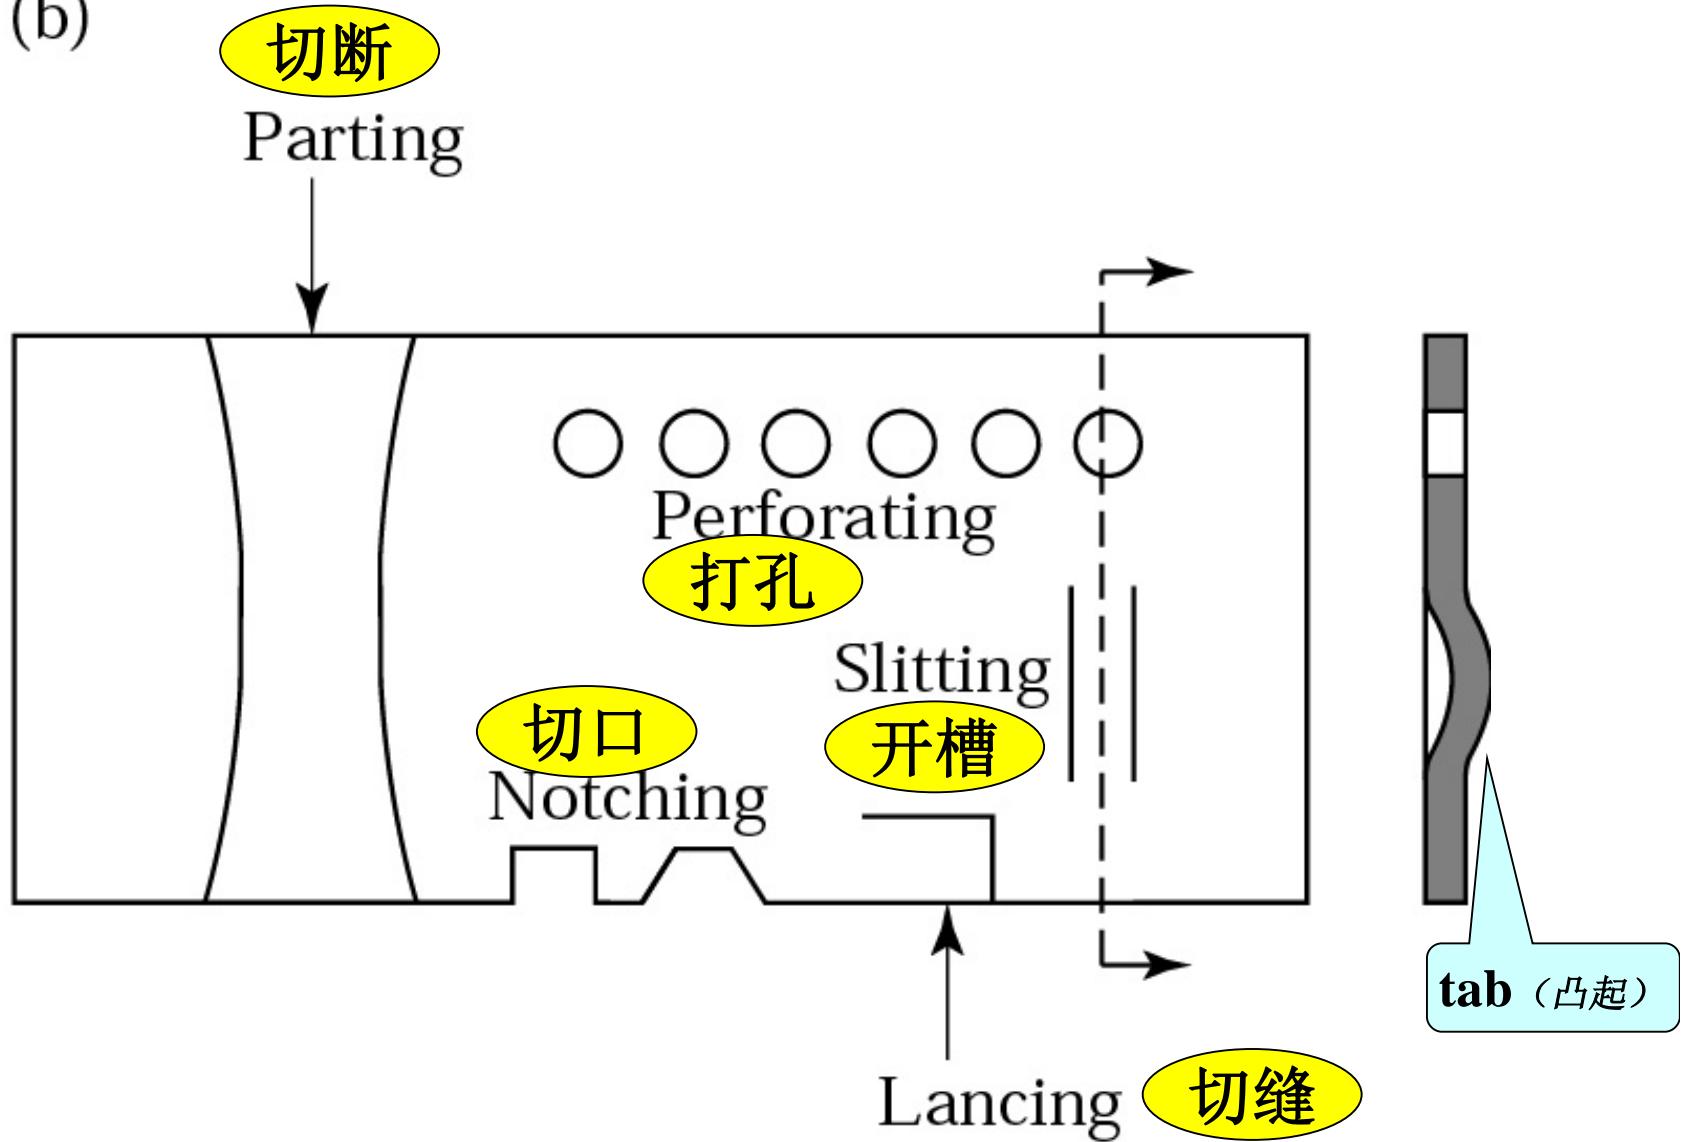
(b) Examples of various shearing operations on sheet metal.
